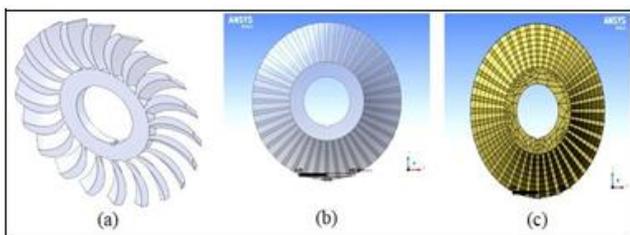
Steam turbine impeller with blades (a) Comprehensive three-dimensional model (b) Inclusive ANSYS imported model (c) Complete ANSYS meshed model.
